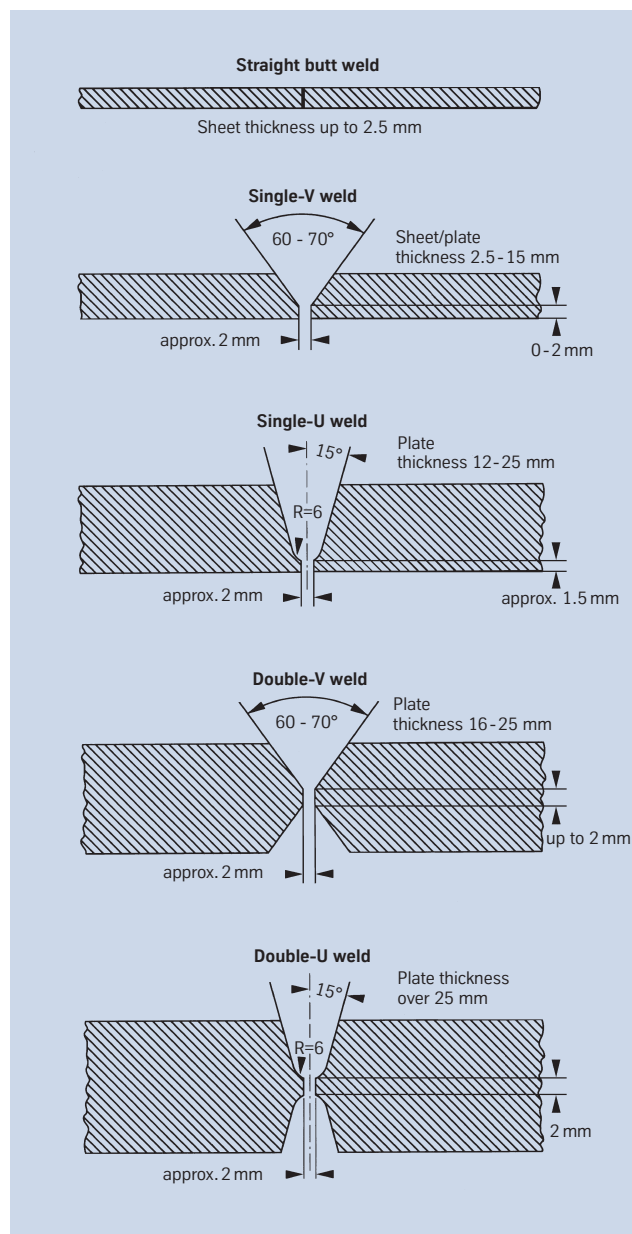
Edge preparation for welding of nickel-base alloys and special stainless steels.
